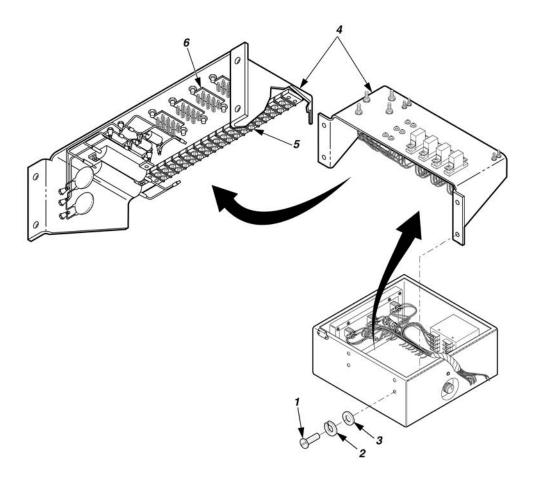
Relay Board Harness Assembly W11 Removal.
